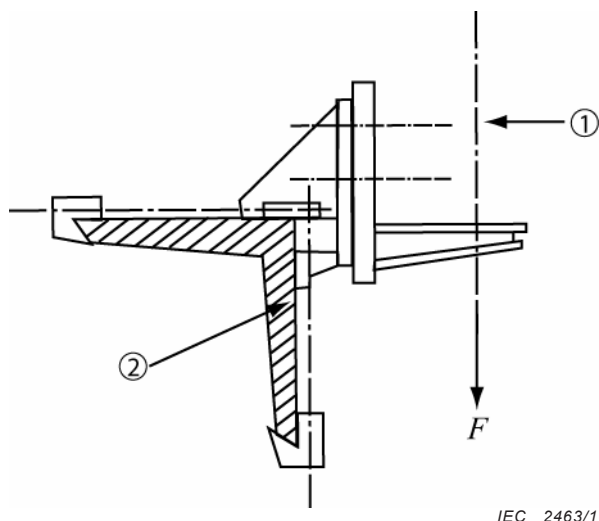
Tower-arm yoke – bending test5.5.2.12 Platform pivot attachment – bending test5.5.2.12.1 On inner flange of steel angle
